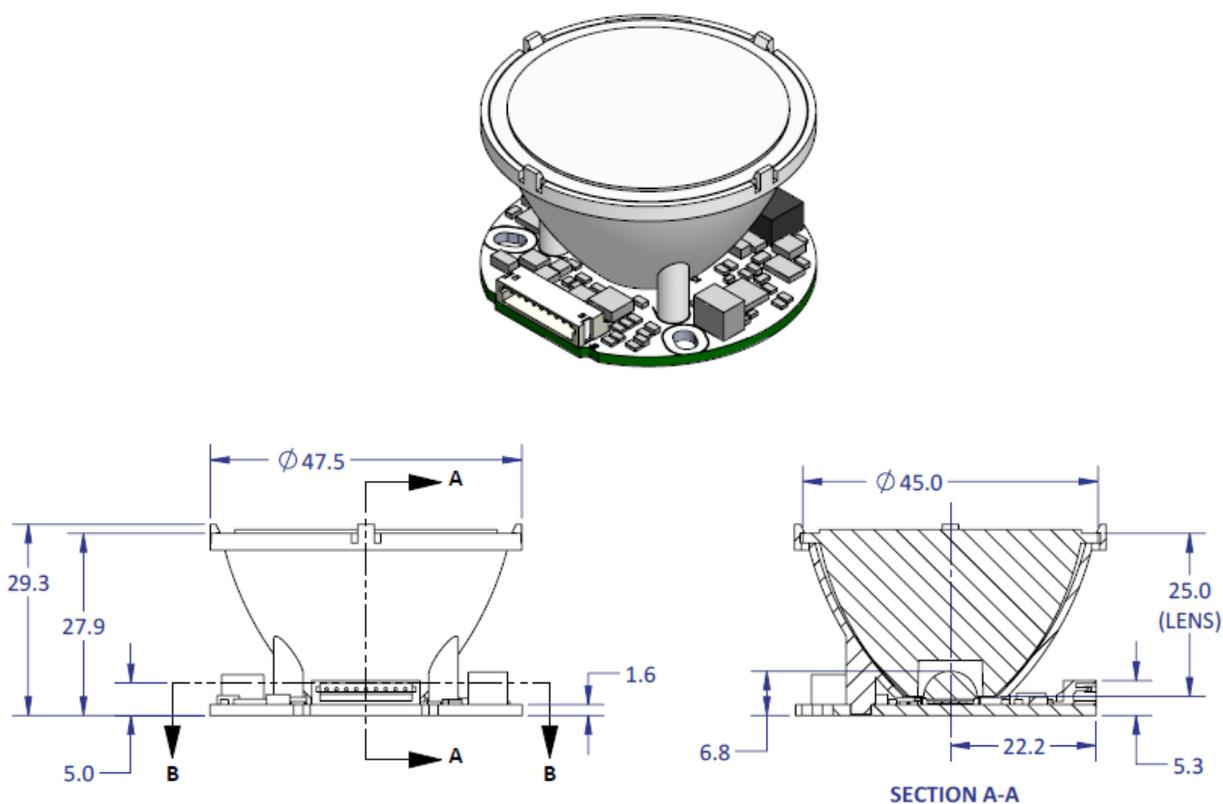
Mechanical dimensions of LuxiTune light engine – with secondary lens
